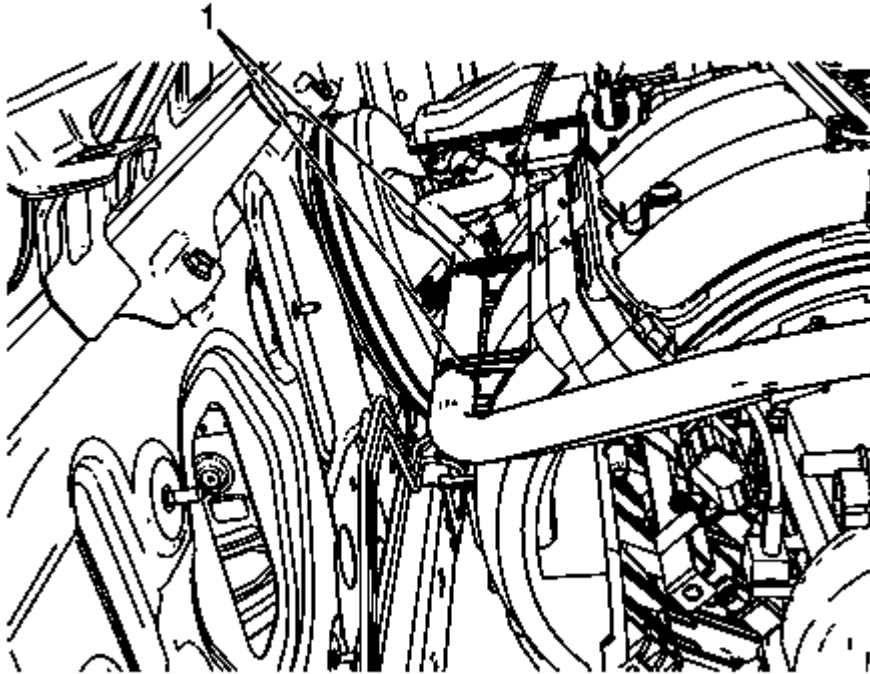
Power Brake Booster Vacuum Hose And Brackets
